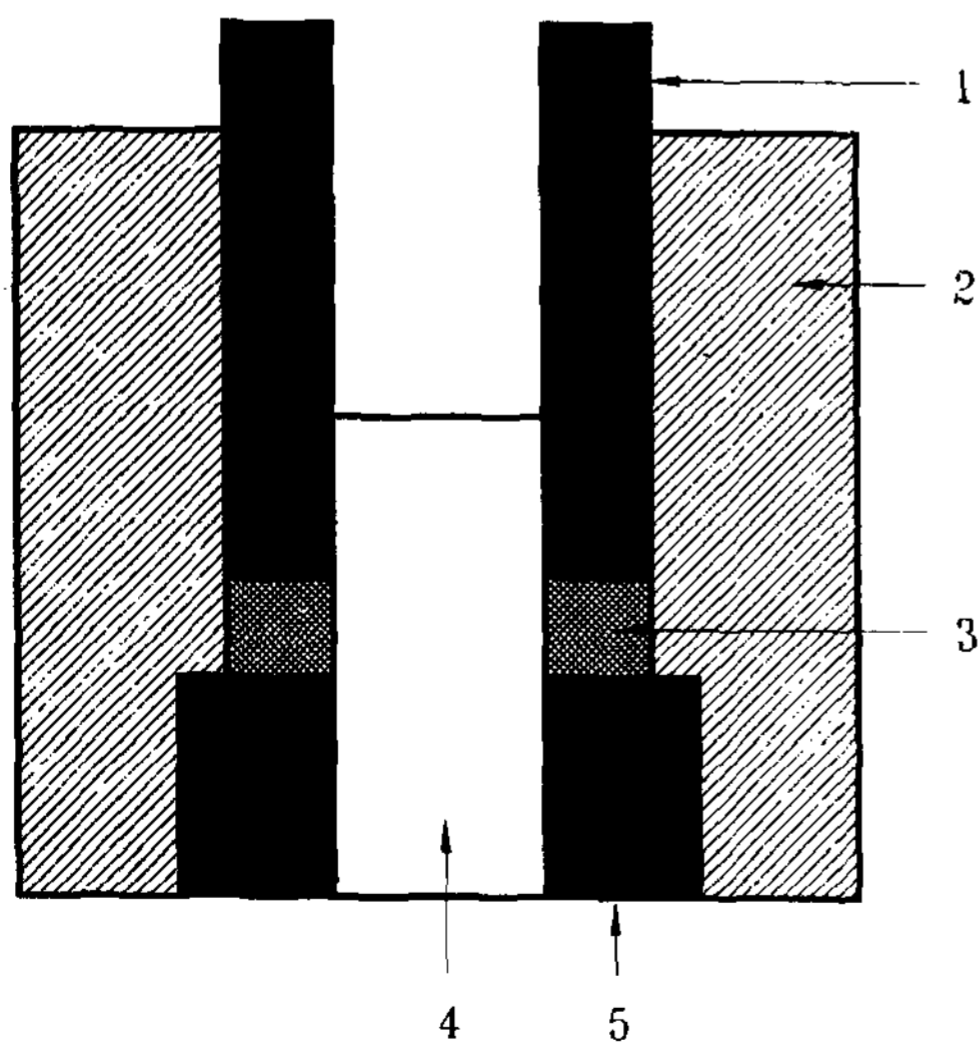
Schematic diagram of cold compacting mold for making salt core. 1. punch, 2. mold, 3. salt core, 4. center rod, 5. bottom support.
